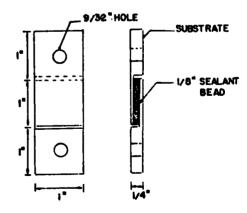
Dimensions of Gunned Sealant Shear Specimen
